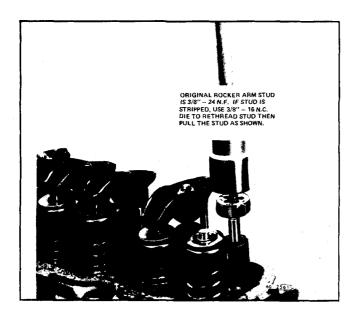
Rethreading Stripped Rocker Arm Stud
